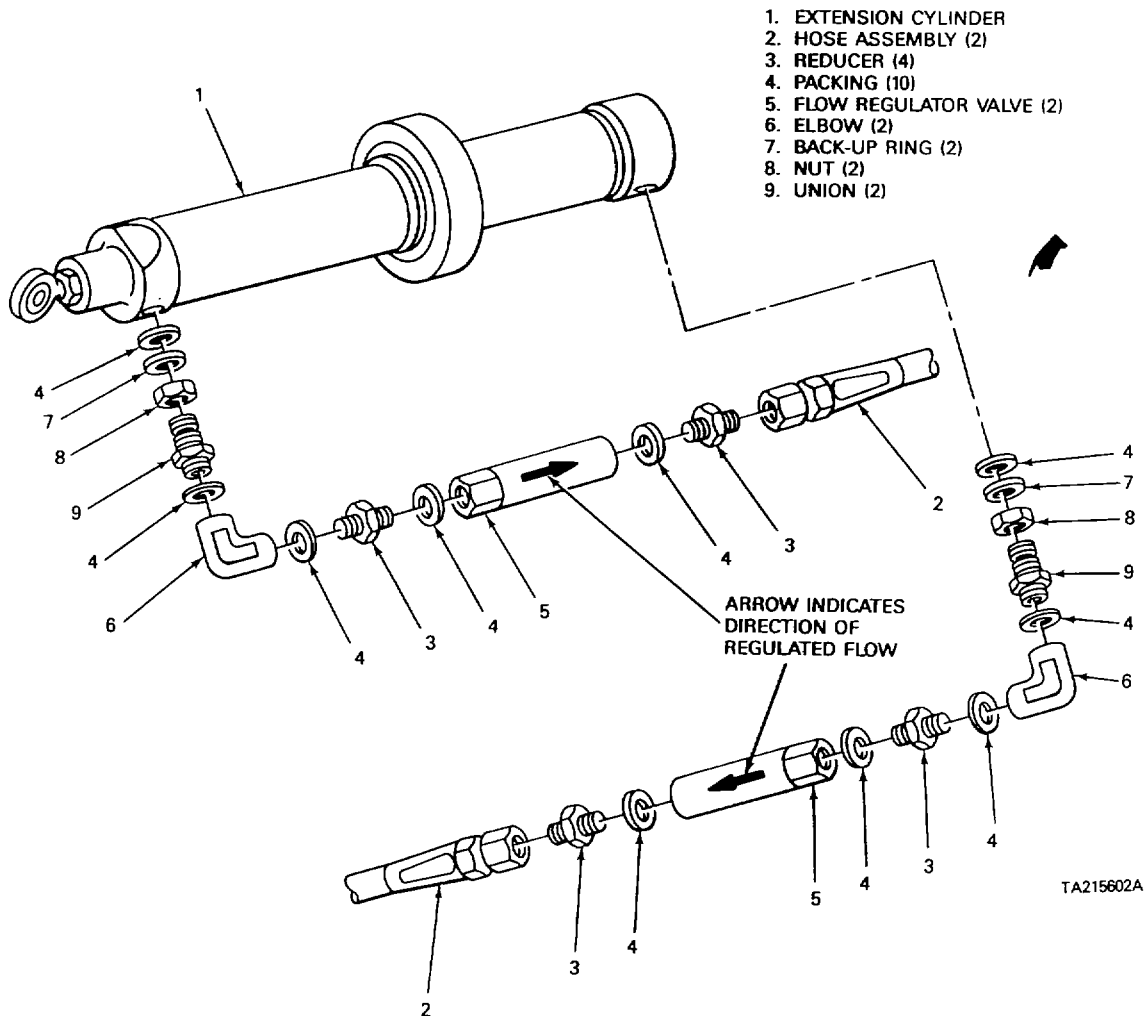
Extension Cylinder - Flow Regulator Valve Removal
